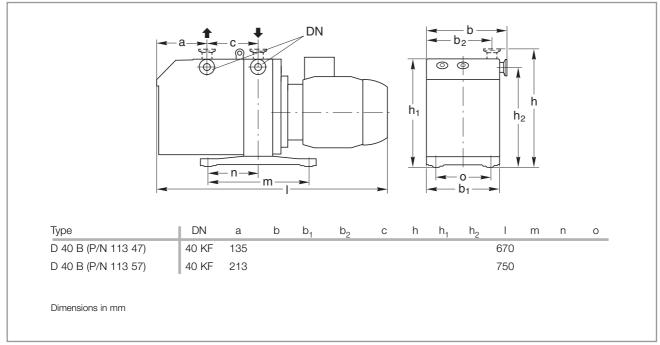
Dimensional drawing for the TRIVAC rotary vane pumps (Dimensions a, I, b to b2 and h1 are approximate)
